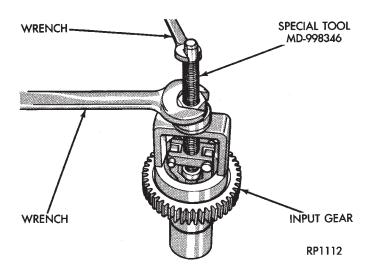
Removing Mainshaft Pilot Bearing From Input Gear
